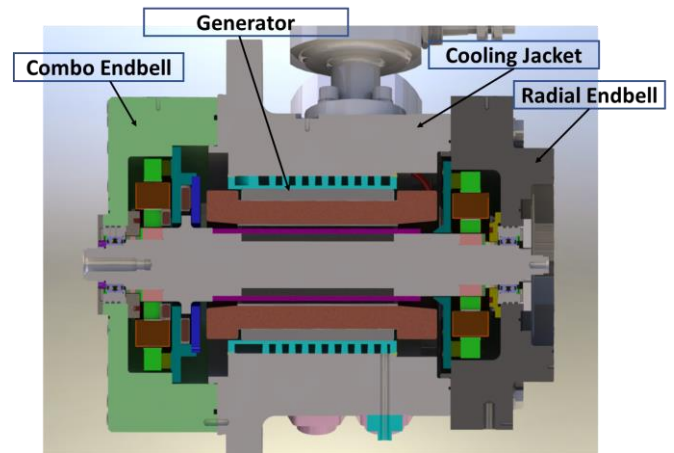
Generator layout showing cooling jacket and magnetic bearing endbell assemblies
